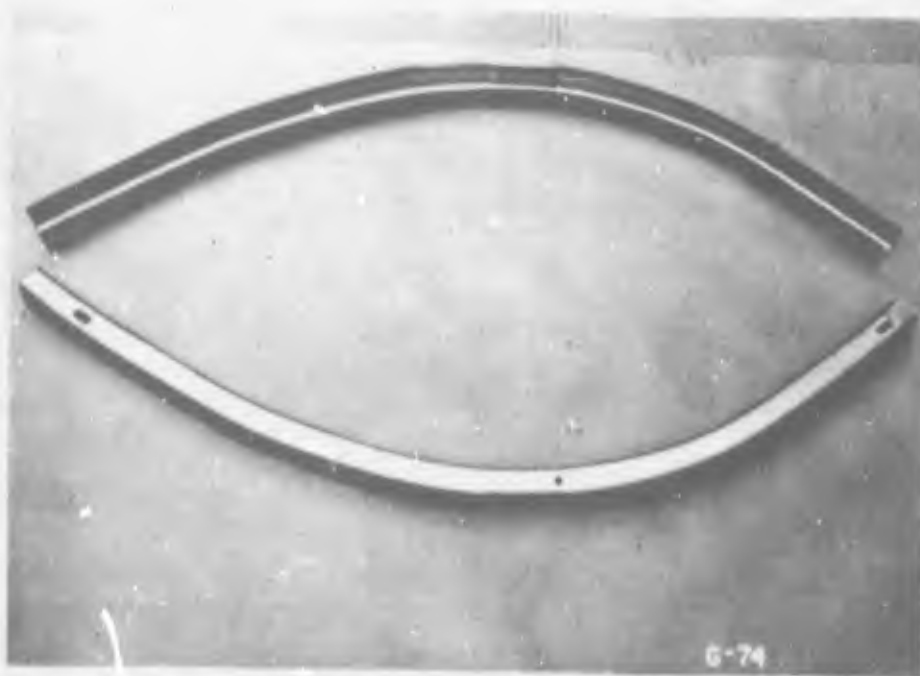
Part 2, Door Channel, One-Step Formed Part, .070" Gauge Material
